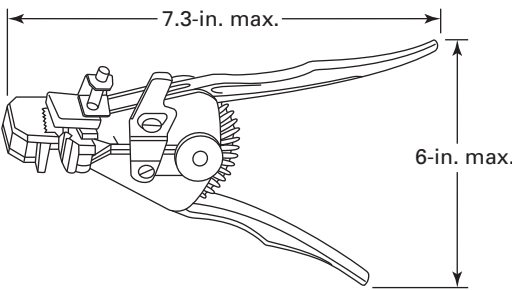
Type II, Class 1, Wire Cutter/Stripper, Small Frame, Strippers Forward of Pivot, Nonadjustable, With Spring and Lock Optional
